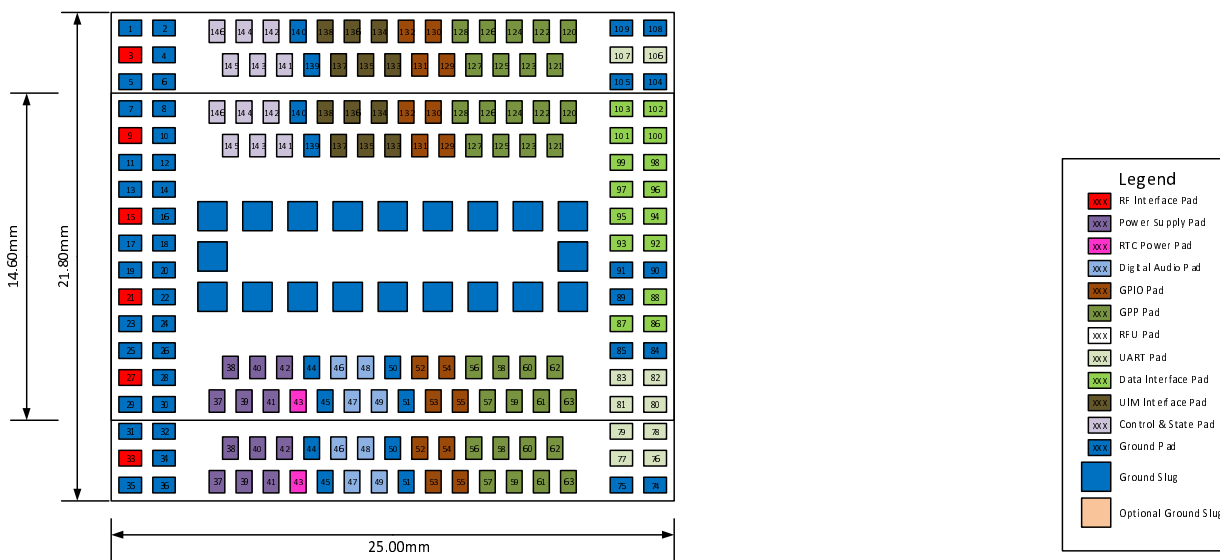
SMT2522 and SMT2515 Common PCB Pad Layout
